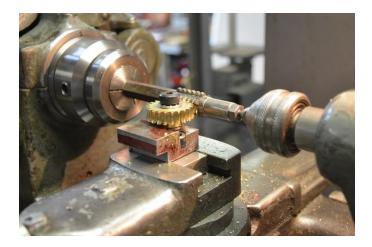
[Thrust bearing is barely visible under nut on top of the worm wheel]
